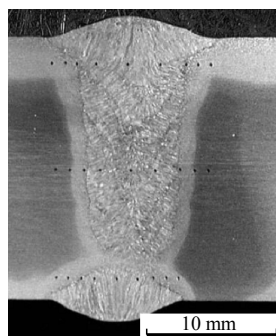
GMAW welded X80 pipes: weld section with 10 kgf Vickers hardness indentations after 2 % nital etching.
